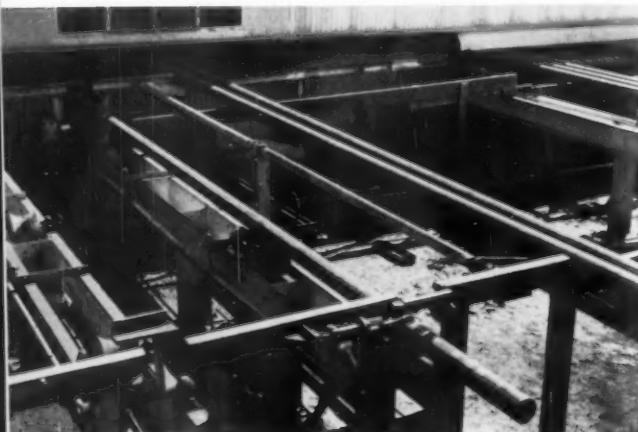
Mechanized handling equipment moves pipe through successive operations on end to which tool joint has been attached.
